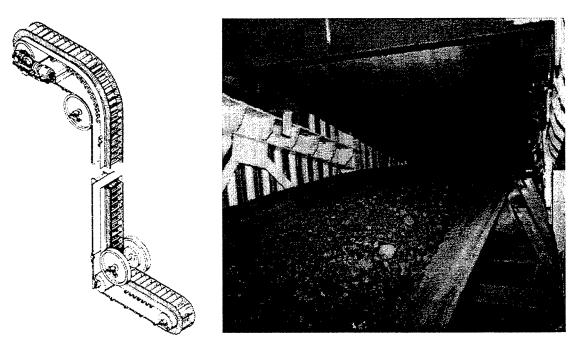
Sidewall conveyor /8/. Figure 18 Sandwitch conveyor /9/
